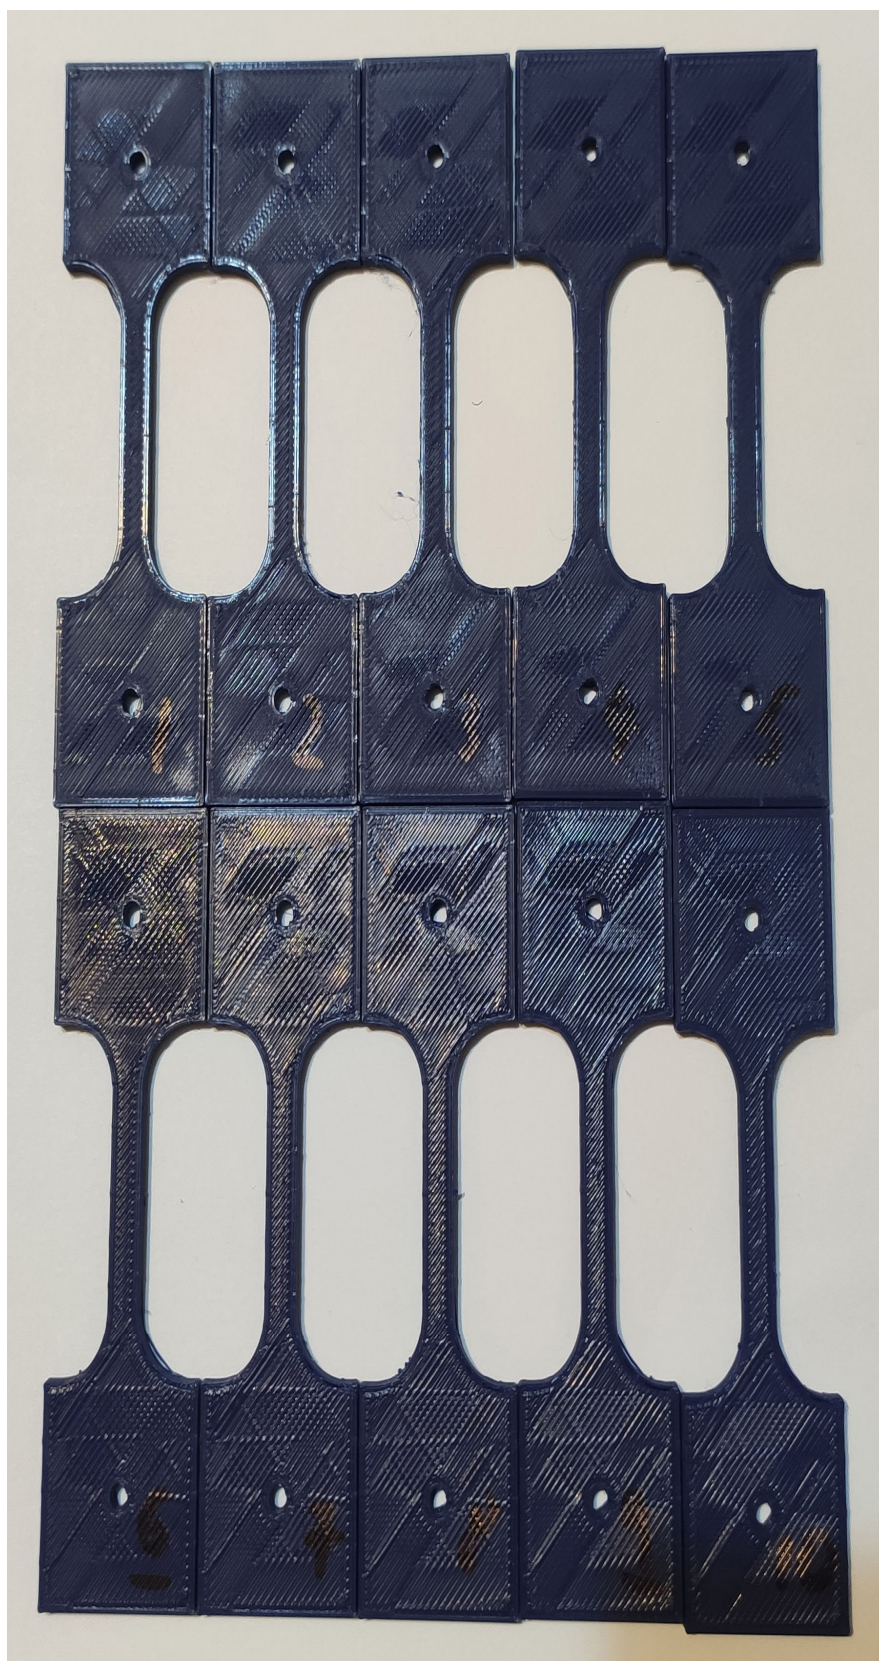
3D-printed parts for tensile creep testing, from PLA.
